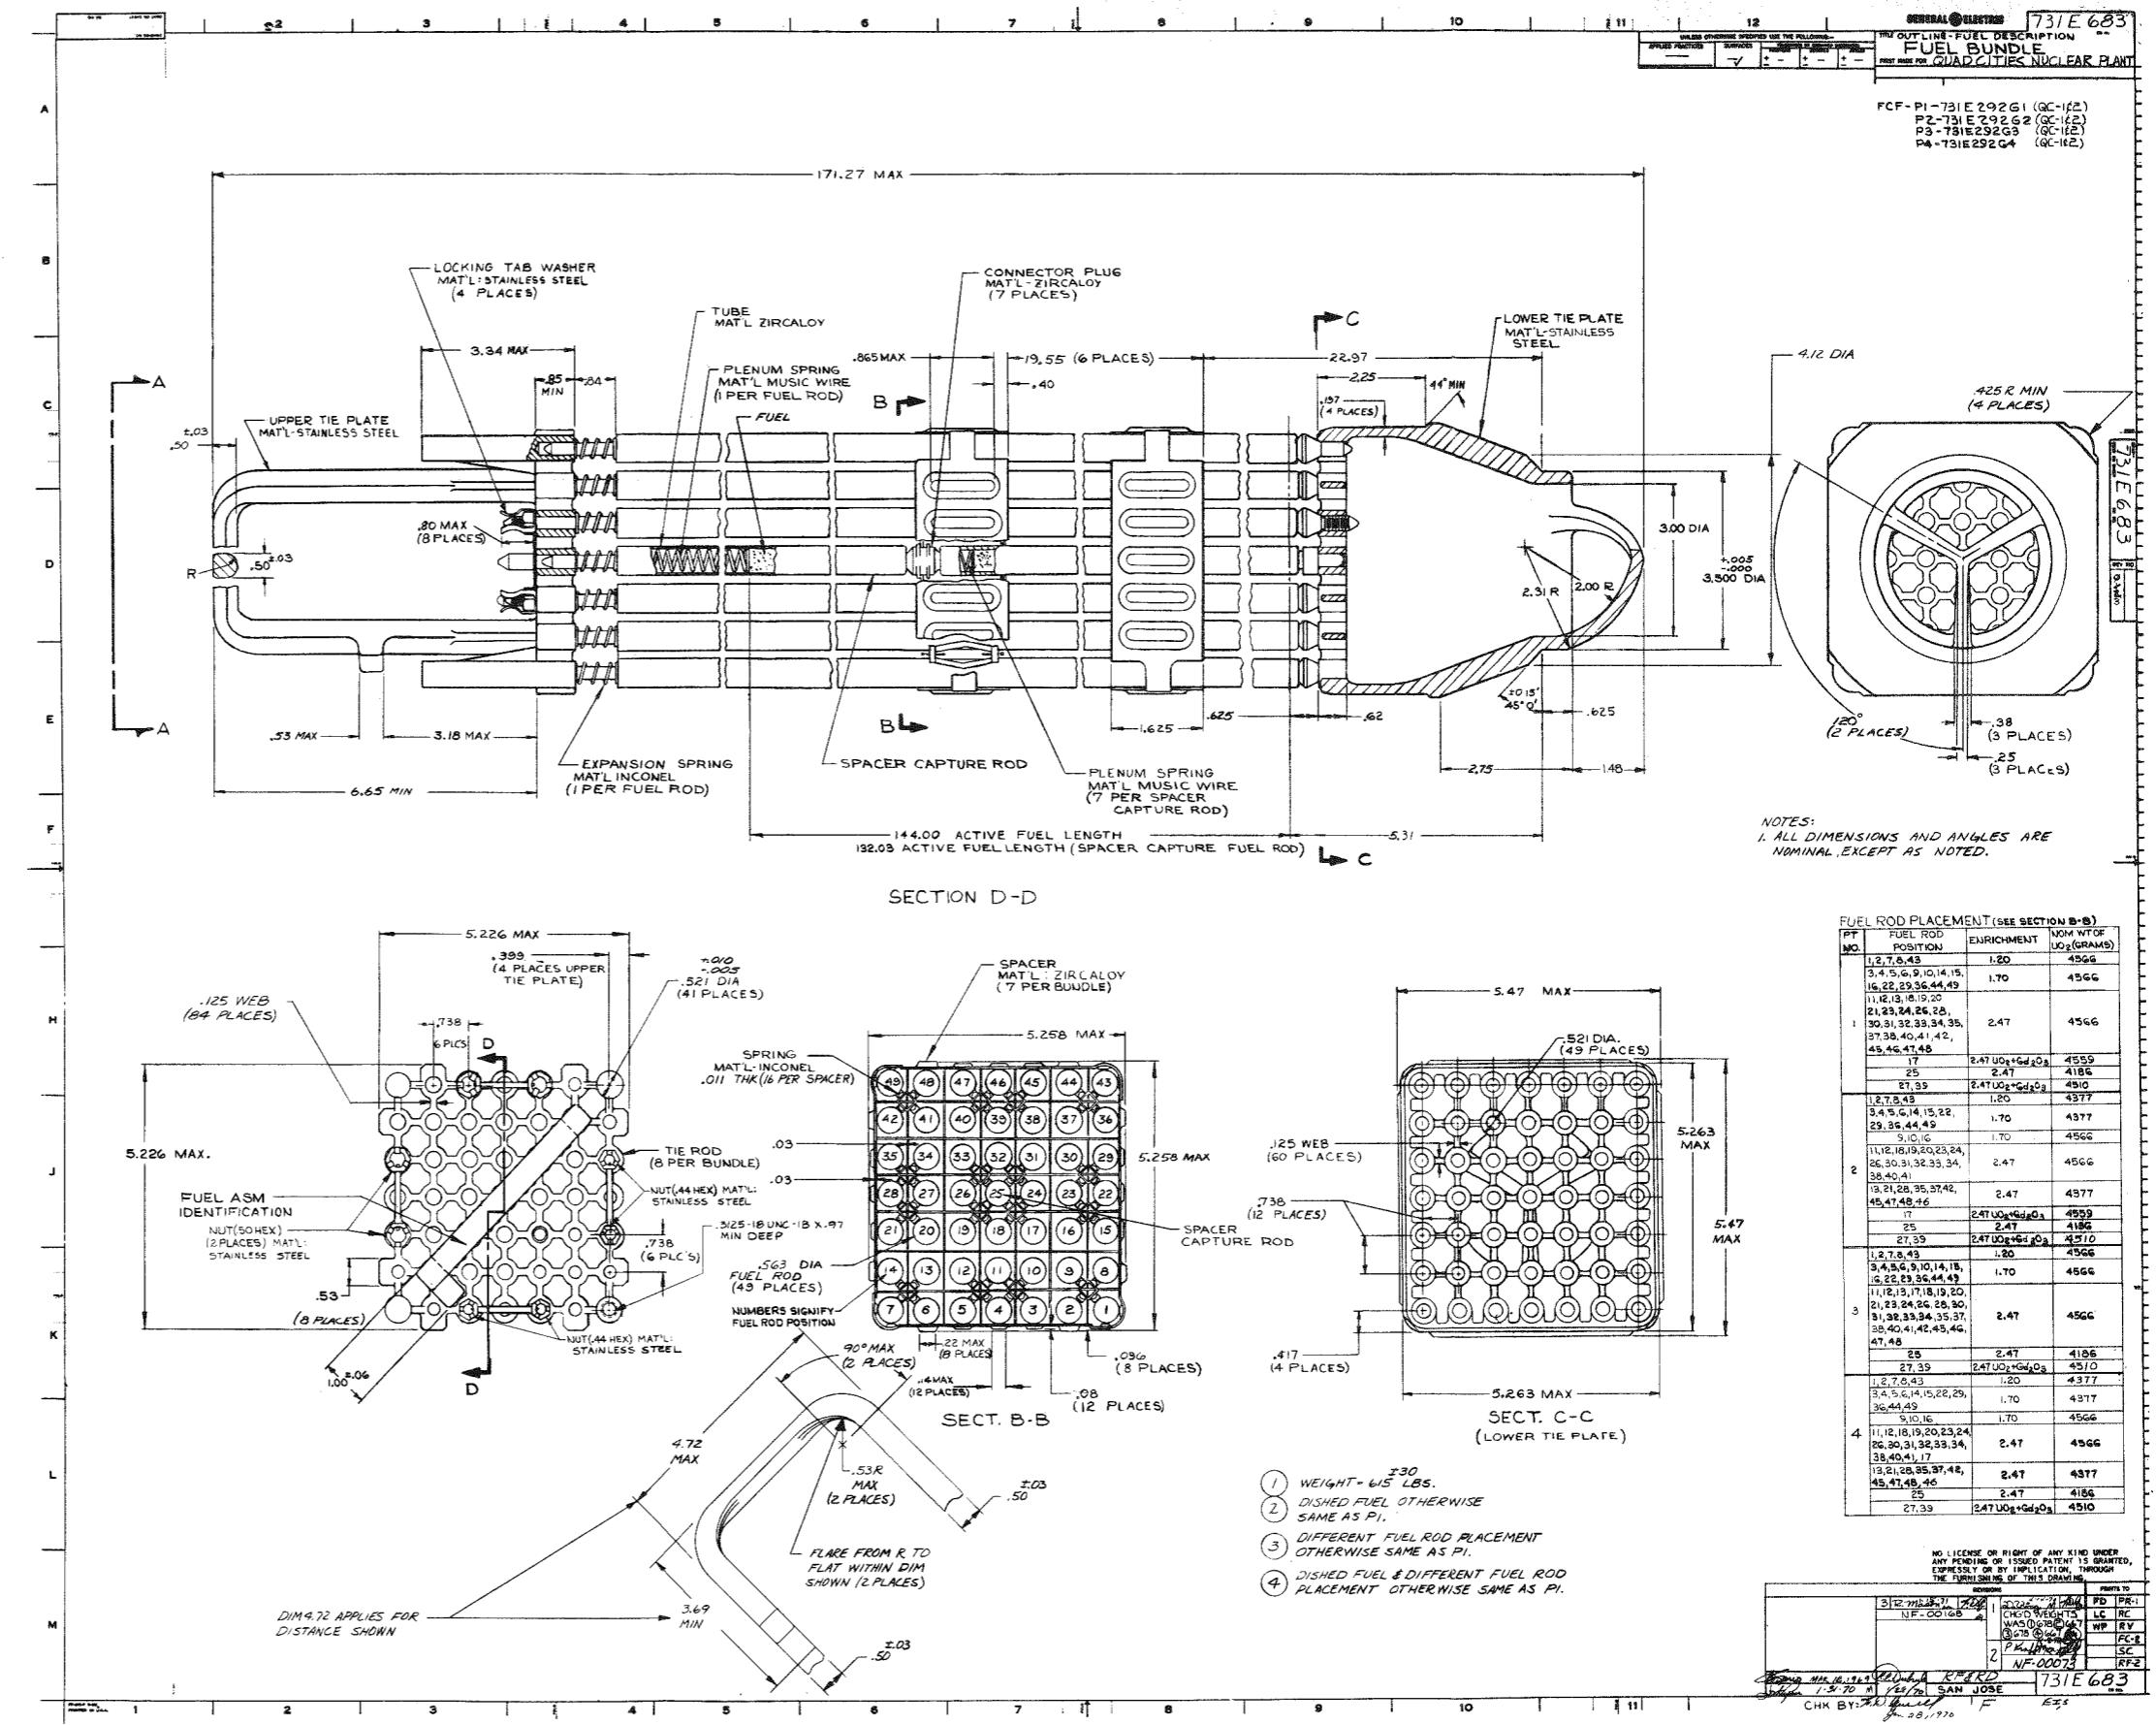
Fuel Assembly Drawing for Initial Core Fuel
